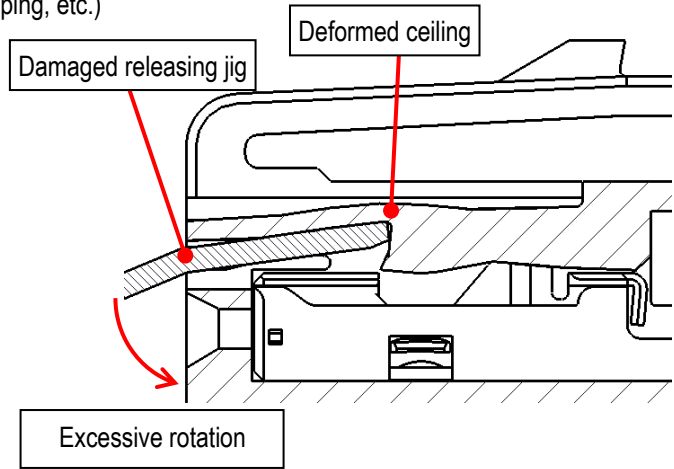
Deformed ceiling, Damaged releasing jig
